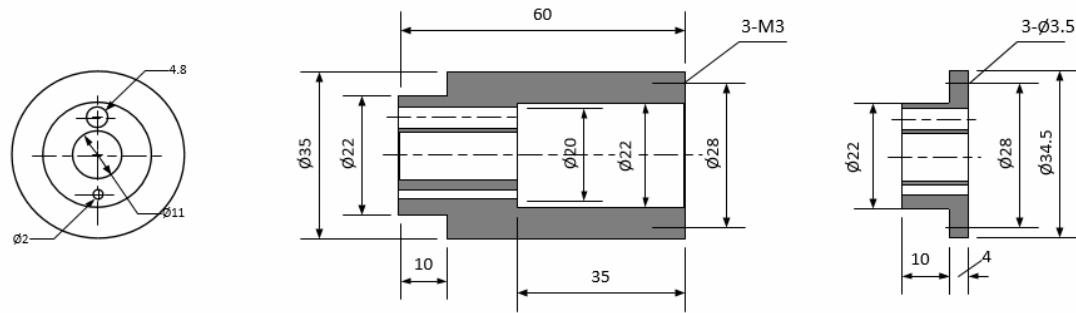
Complete mechanical drawing of the integrated probe.
